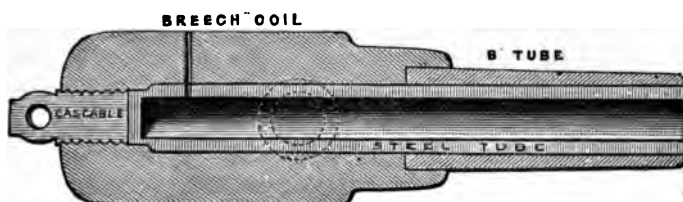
SECTION OF 9-INCH FRASER GUN.
